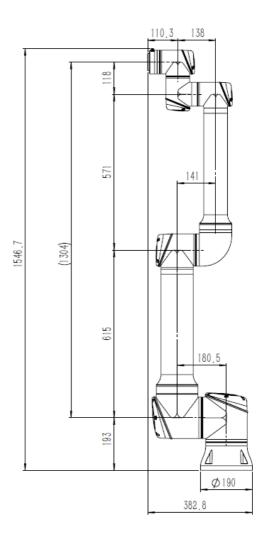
Mechanical dimensions of the CS612 robot, with unit of mm
